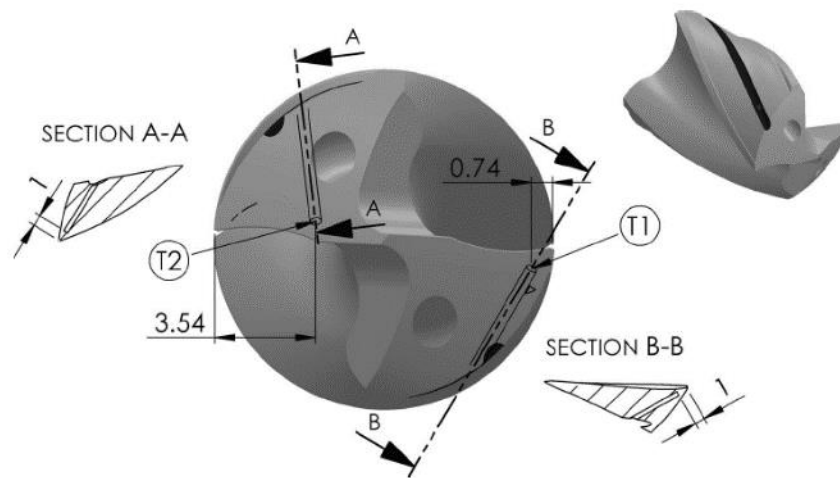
Drill instrumentation with thermocouples for temperature measurements. T1 and T2 show the location of thermocouples [32].
